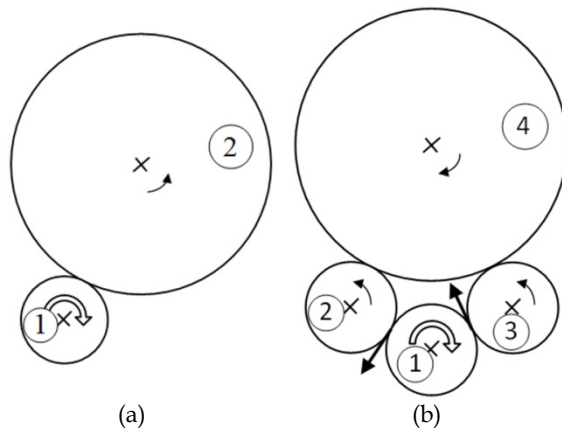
(a) Standard gearbox assembly; (b) Split torque gearbox assembly
